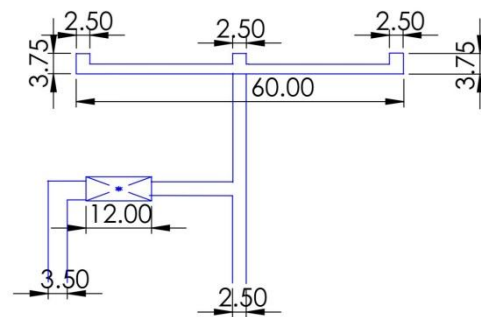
CADD drawing of exhaust duct and blower and its dimensions
